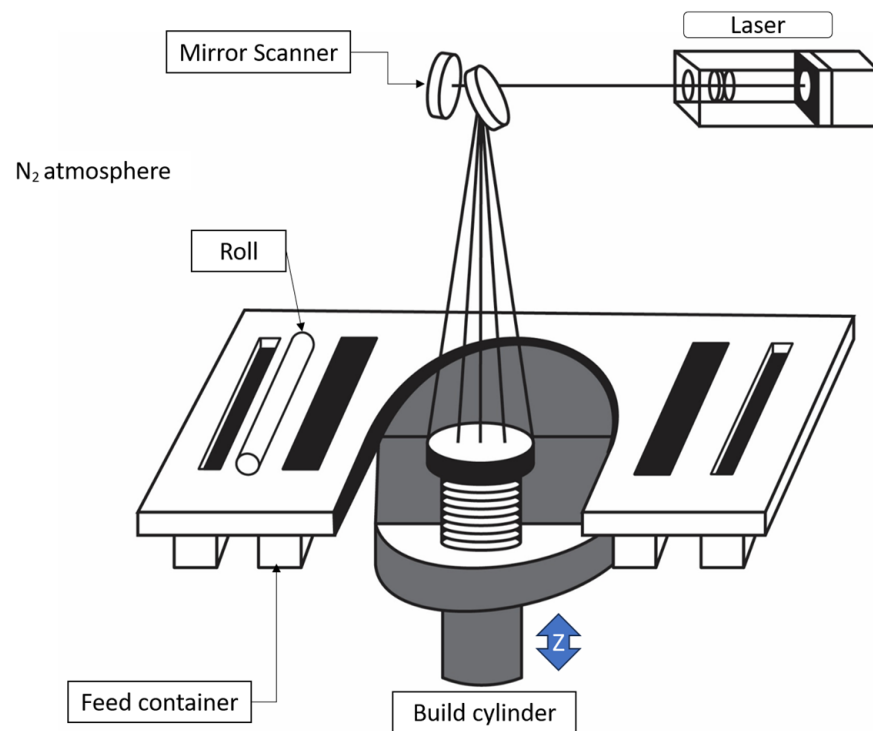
Schematic drawing of an SLS printer. Imaged drawn based on [34].
